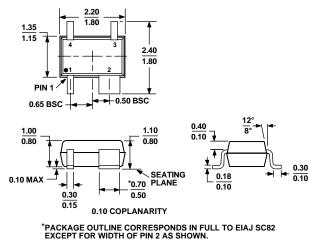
4-Lead Thin Shrink Small Outline Transistor Package [SC70] (KS-4) Dimensions shown in millimeters
